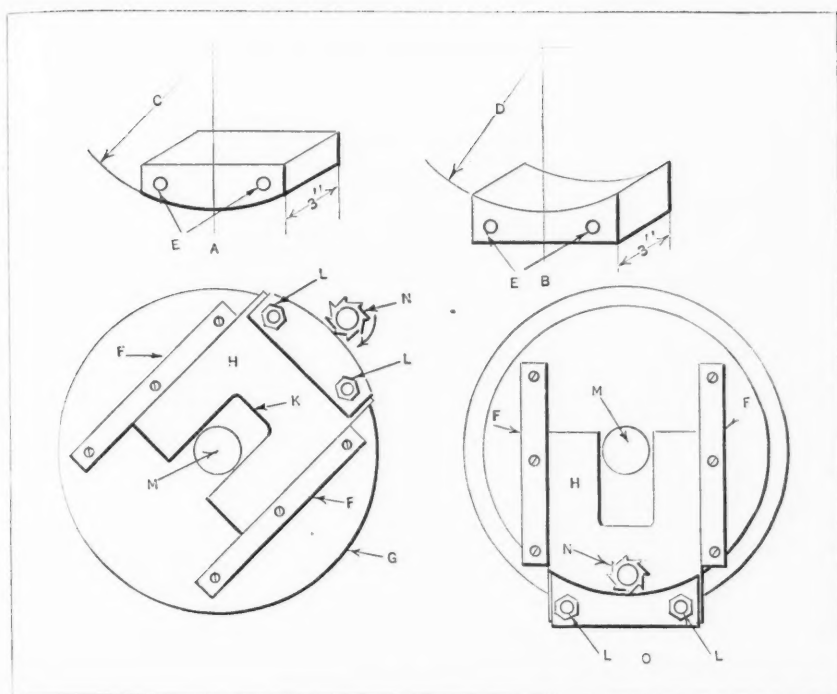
Large-radius Forming Punches and Dies and Set-up Used in Milling Curved Surfaces
